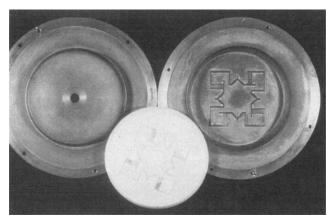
Sprayed 410 stainless steel-faced injection mold
